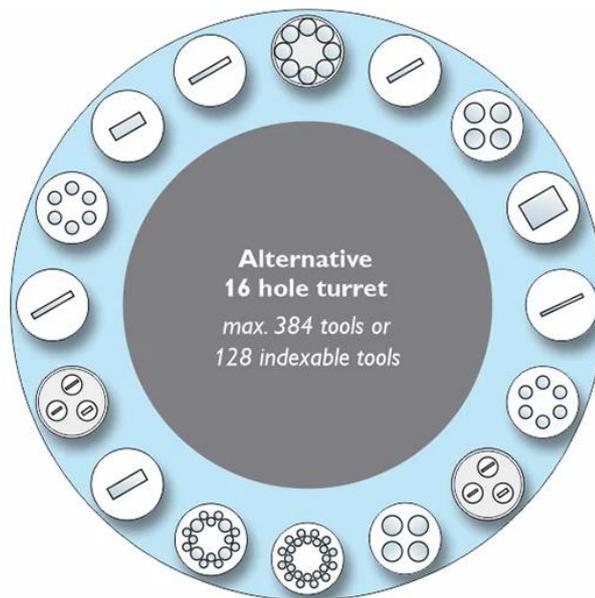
Prima Power turret with 16 tool holes (PRIMA INDUSTRIE S.p.A., n.d.).
